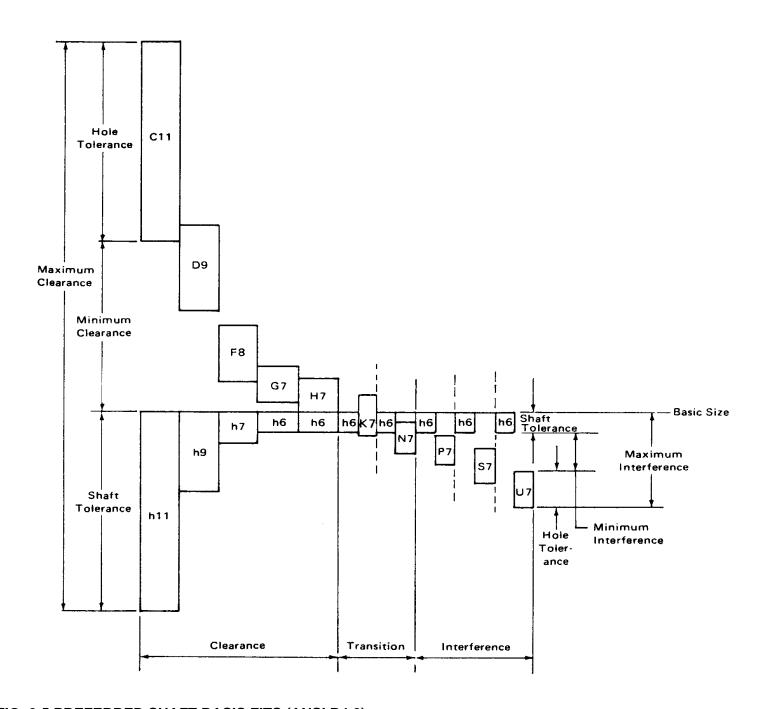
PREFERRED SHAFT BASIS FITS (ANSI B4.2)
